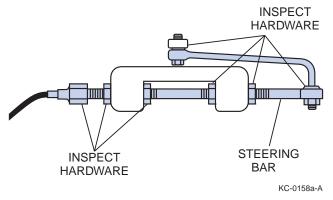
Typical Mechanical Outboard Engine Steering Link
